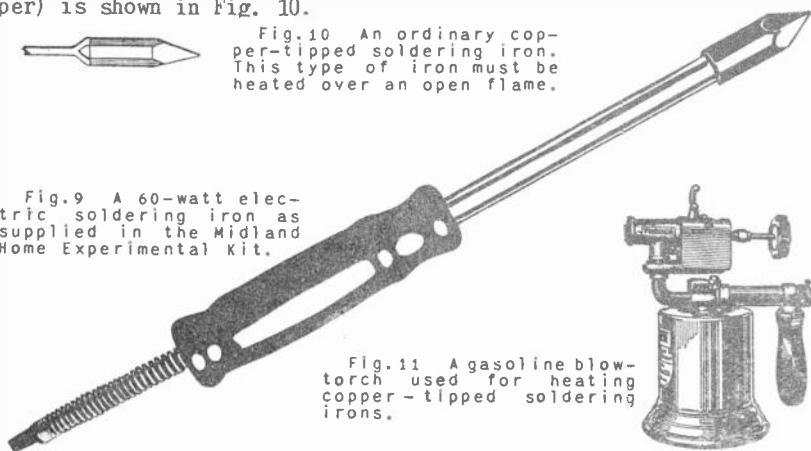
A gasoline blowtorch used for heating copper-tipped soldering irons.
